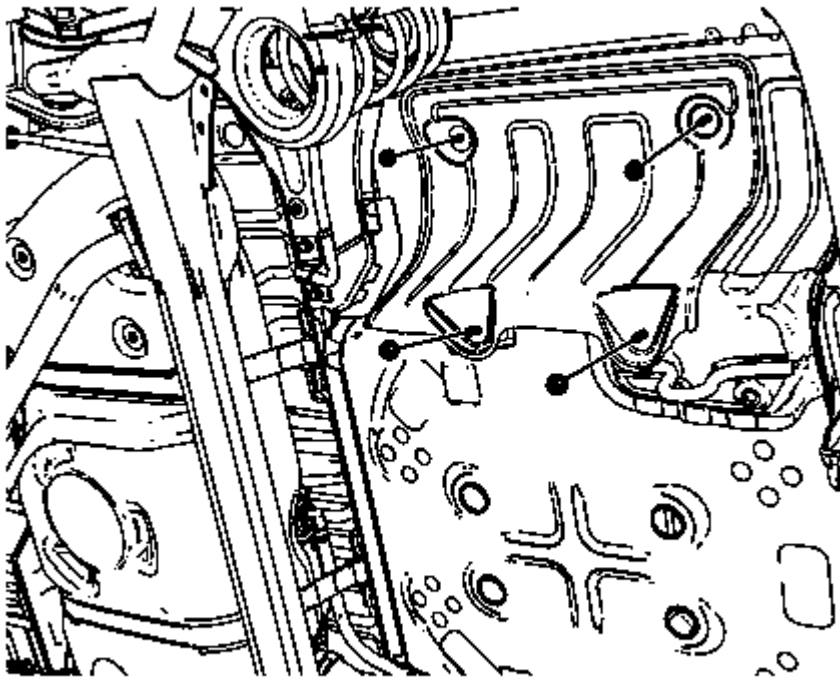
Exhaust Rear Muffler Heat Shield Retaining Nuts
